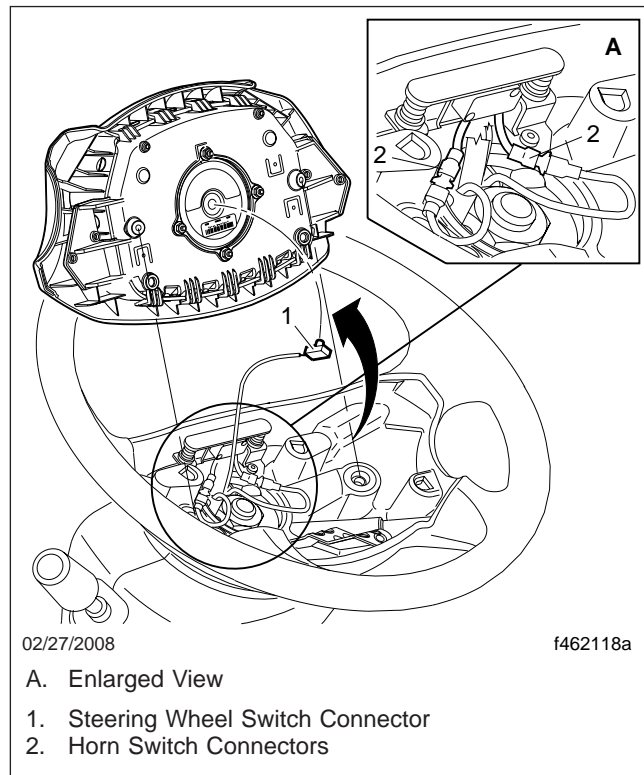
, Steering Wheel Cover Module and Connectors, Air Bag
